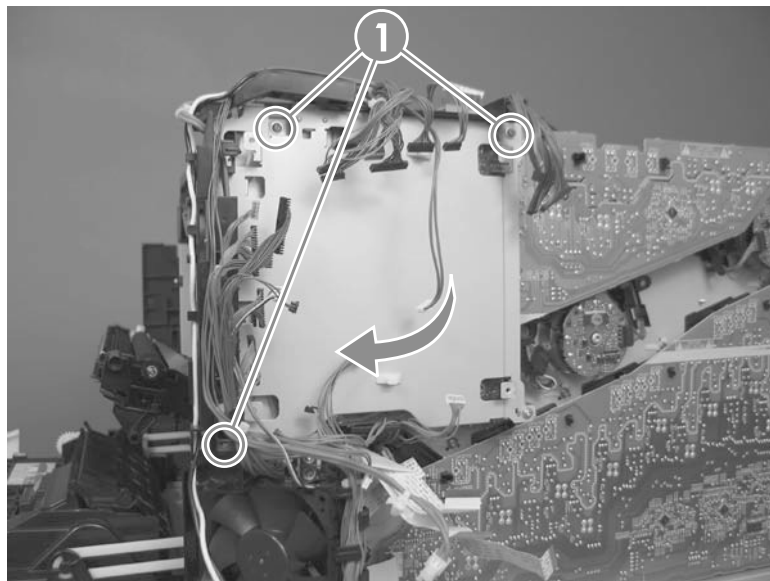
Remove the high-voltage power supply upper (1 of 5)
